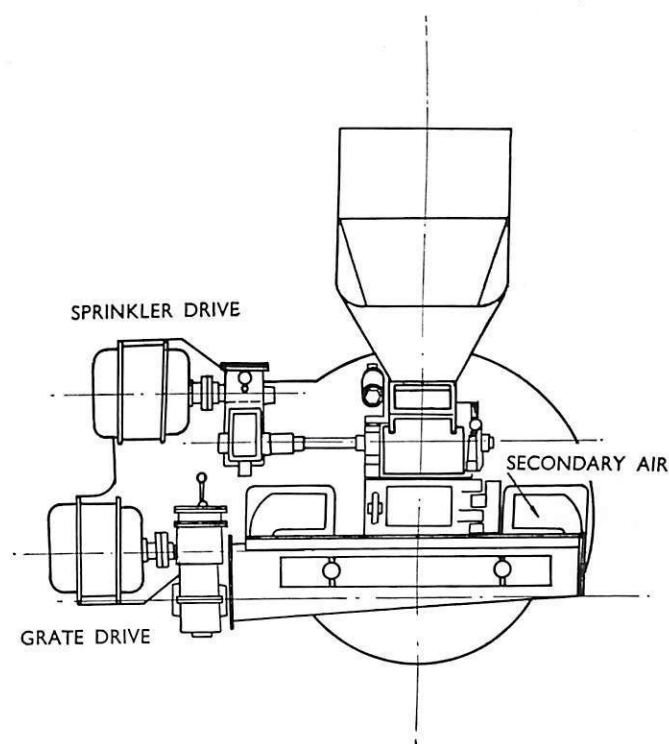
A front view of the "Bennis" sprinkler stoker showing the three-speed motor and gear box which drives the sprinkler mechanism, and the three-speed motor and gear box which drives the self-cleaning grate.
